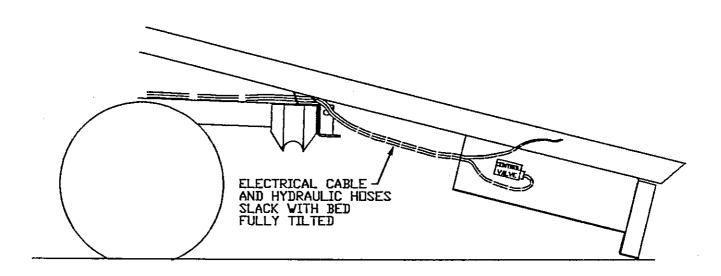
EXAMPLE OF HOSE AND CABLE SLACK
